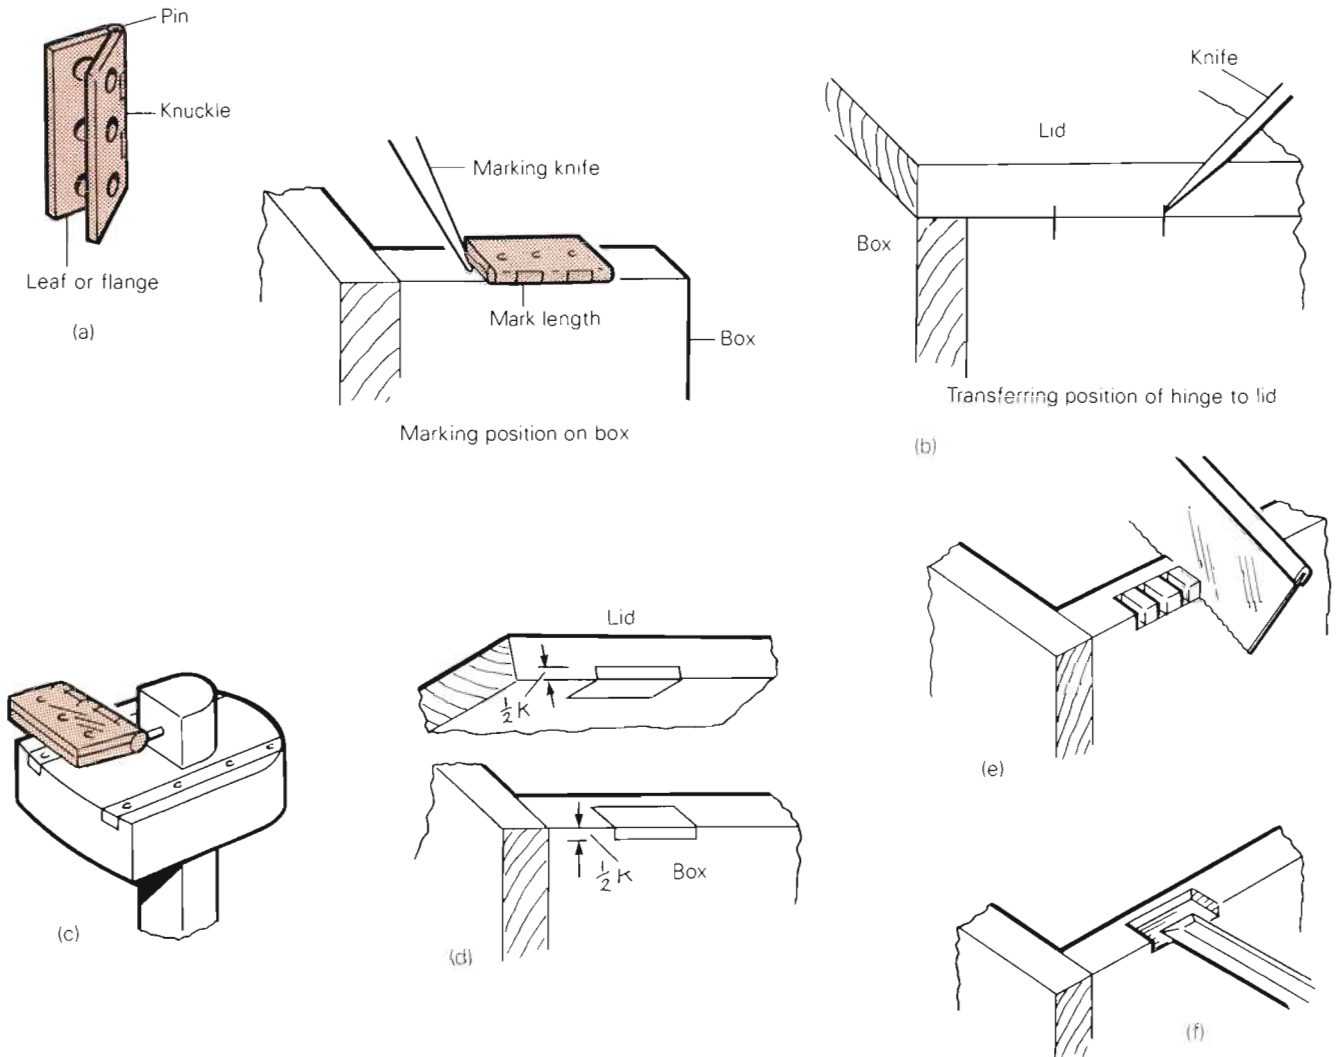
Fitting a butt hinge: (a) parts of a butt hinge, (b) marking the position of the hinge, (c) setting the gauge, (d) gauging width of leaf and half thickness of knuckle on box and lid, (e) sawing waste, (f) chopping and paring waste.
